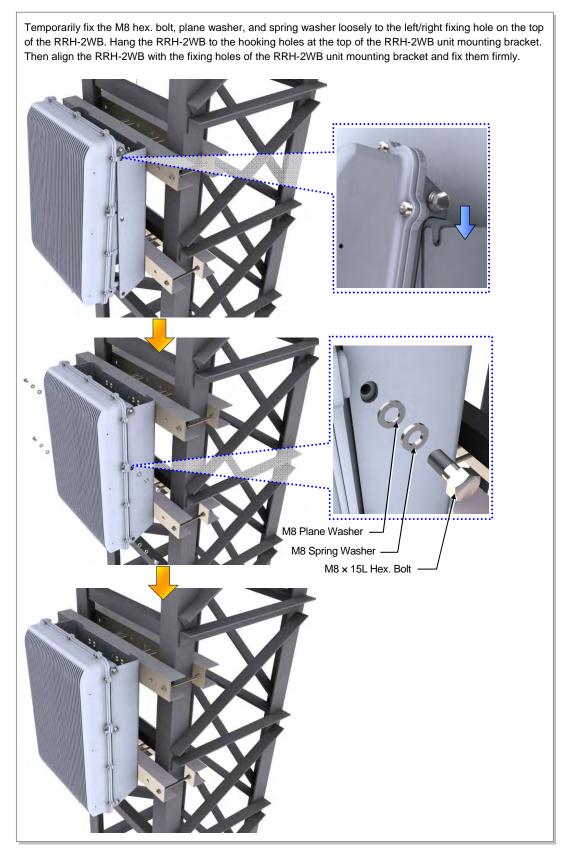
Fixing Tower Type RRH-2WB (4)
